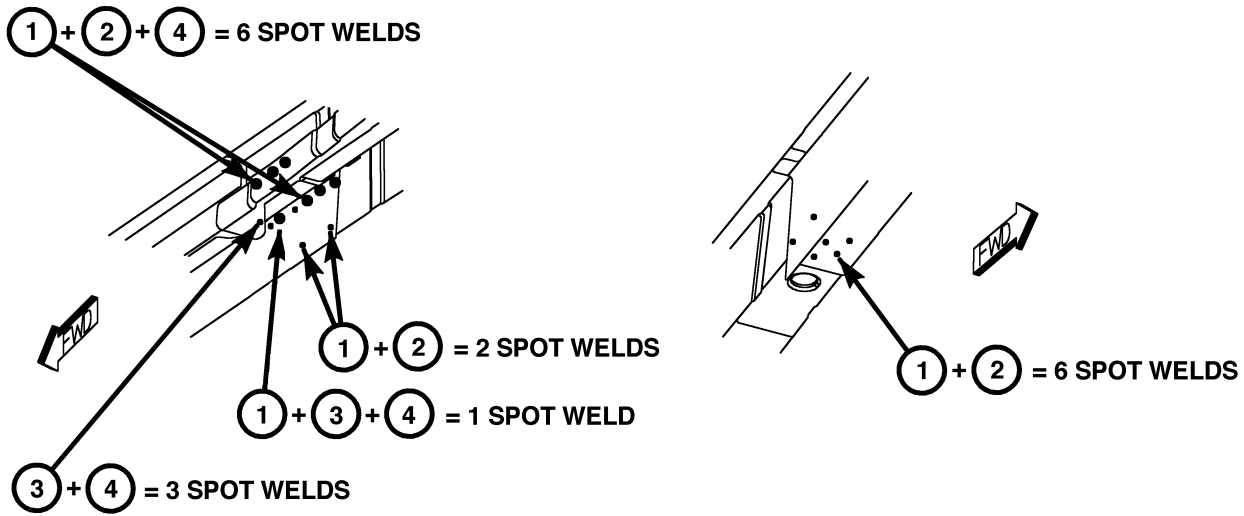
RAIL ASSEMBLIES - FRONT/REAR
